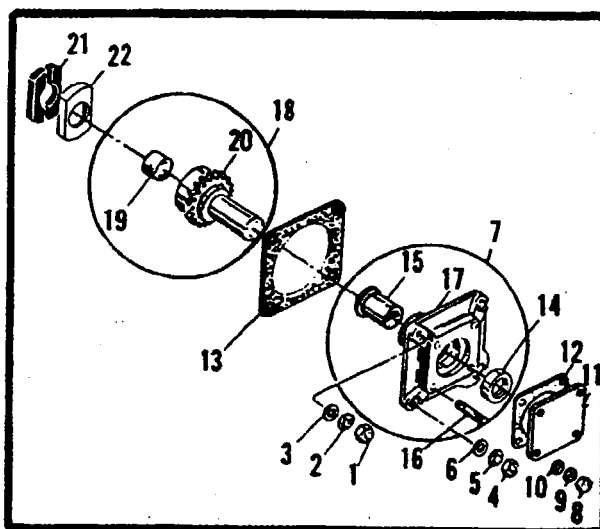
MAGNETO & ACCESSORY DRIVES
